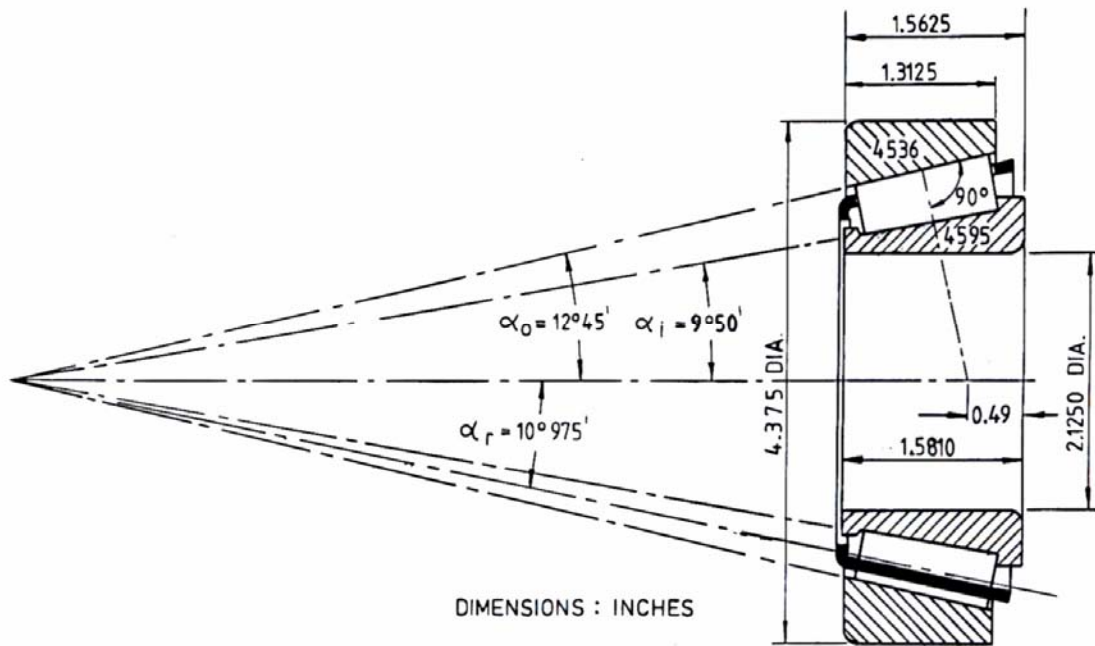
Taper roller bearing ‘Timken 4595/4536’
